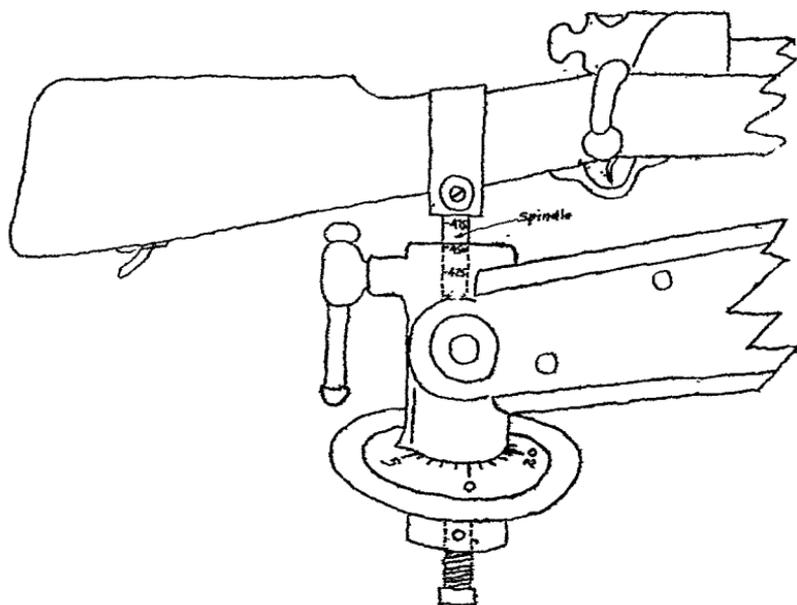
SKETCH SHOWING ELEVATING HANDWHEEL
